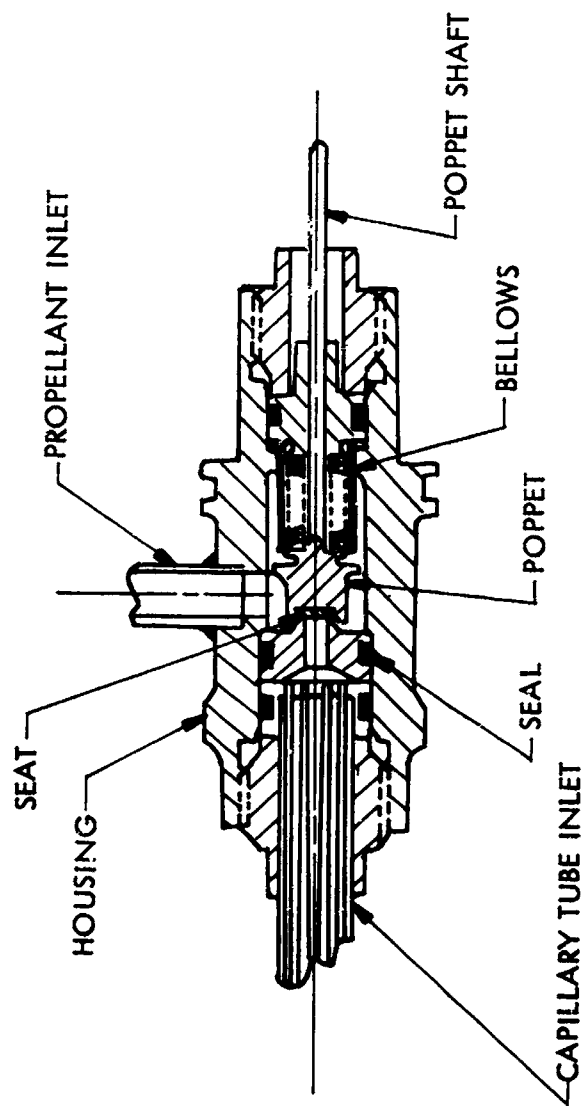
Bellows Sealed Poppet Shaft Cross Section
